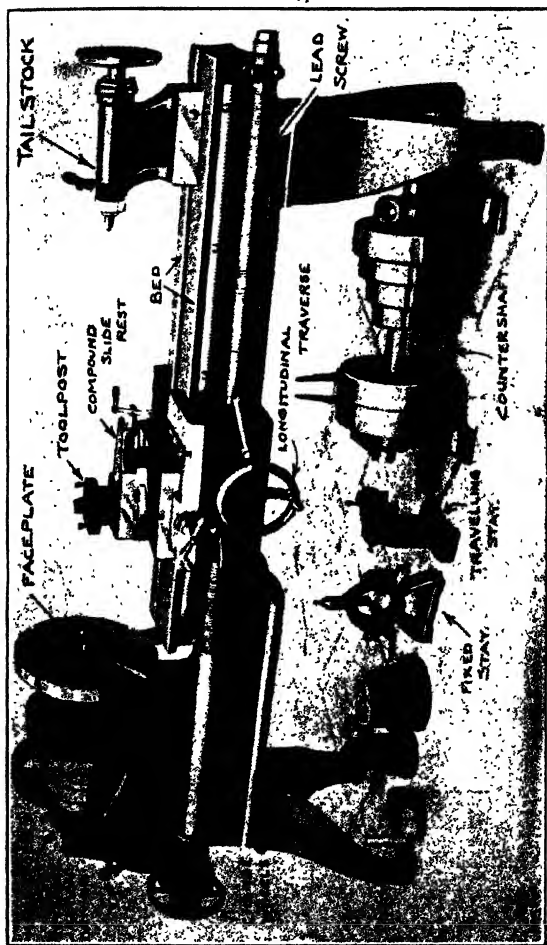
A Cone Pulley-Driven Screw-Cutting Lathe (old type machine). (Compare the design with Figs. 182 and 183.)
